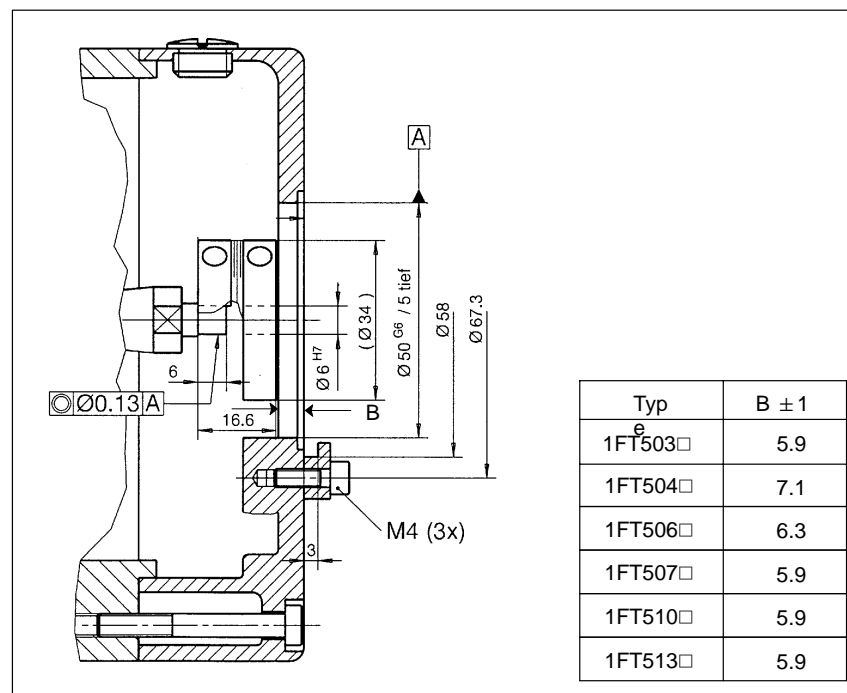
Mounting absolute angle encoders with standard pulse encoder flange onto motors 1FT503□ to 1FT513□
